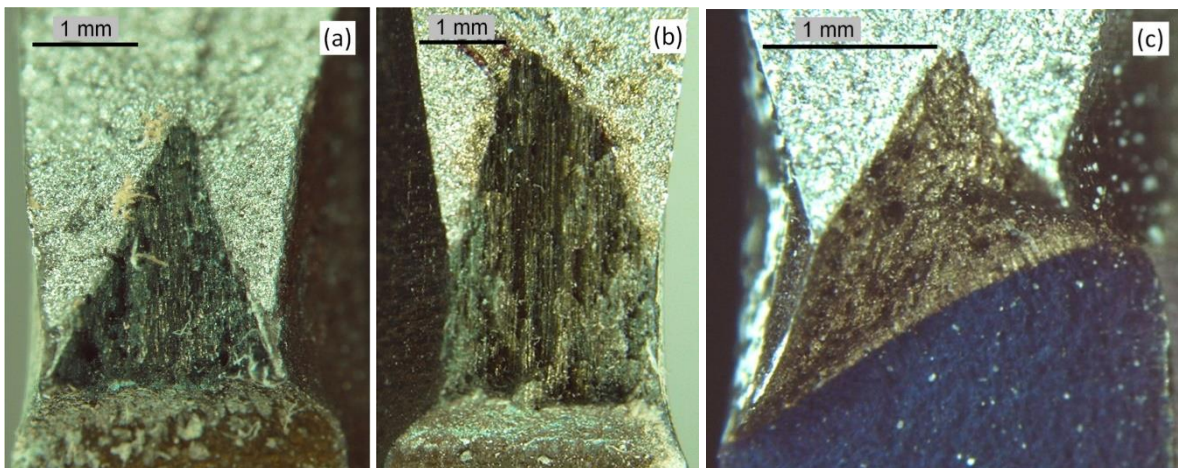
Photographs of fracture surfaces obtained from stereo microscope: (a, b) two PRNB specimens with an initial notch and (c) one with an initial fatigue pre-crack
